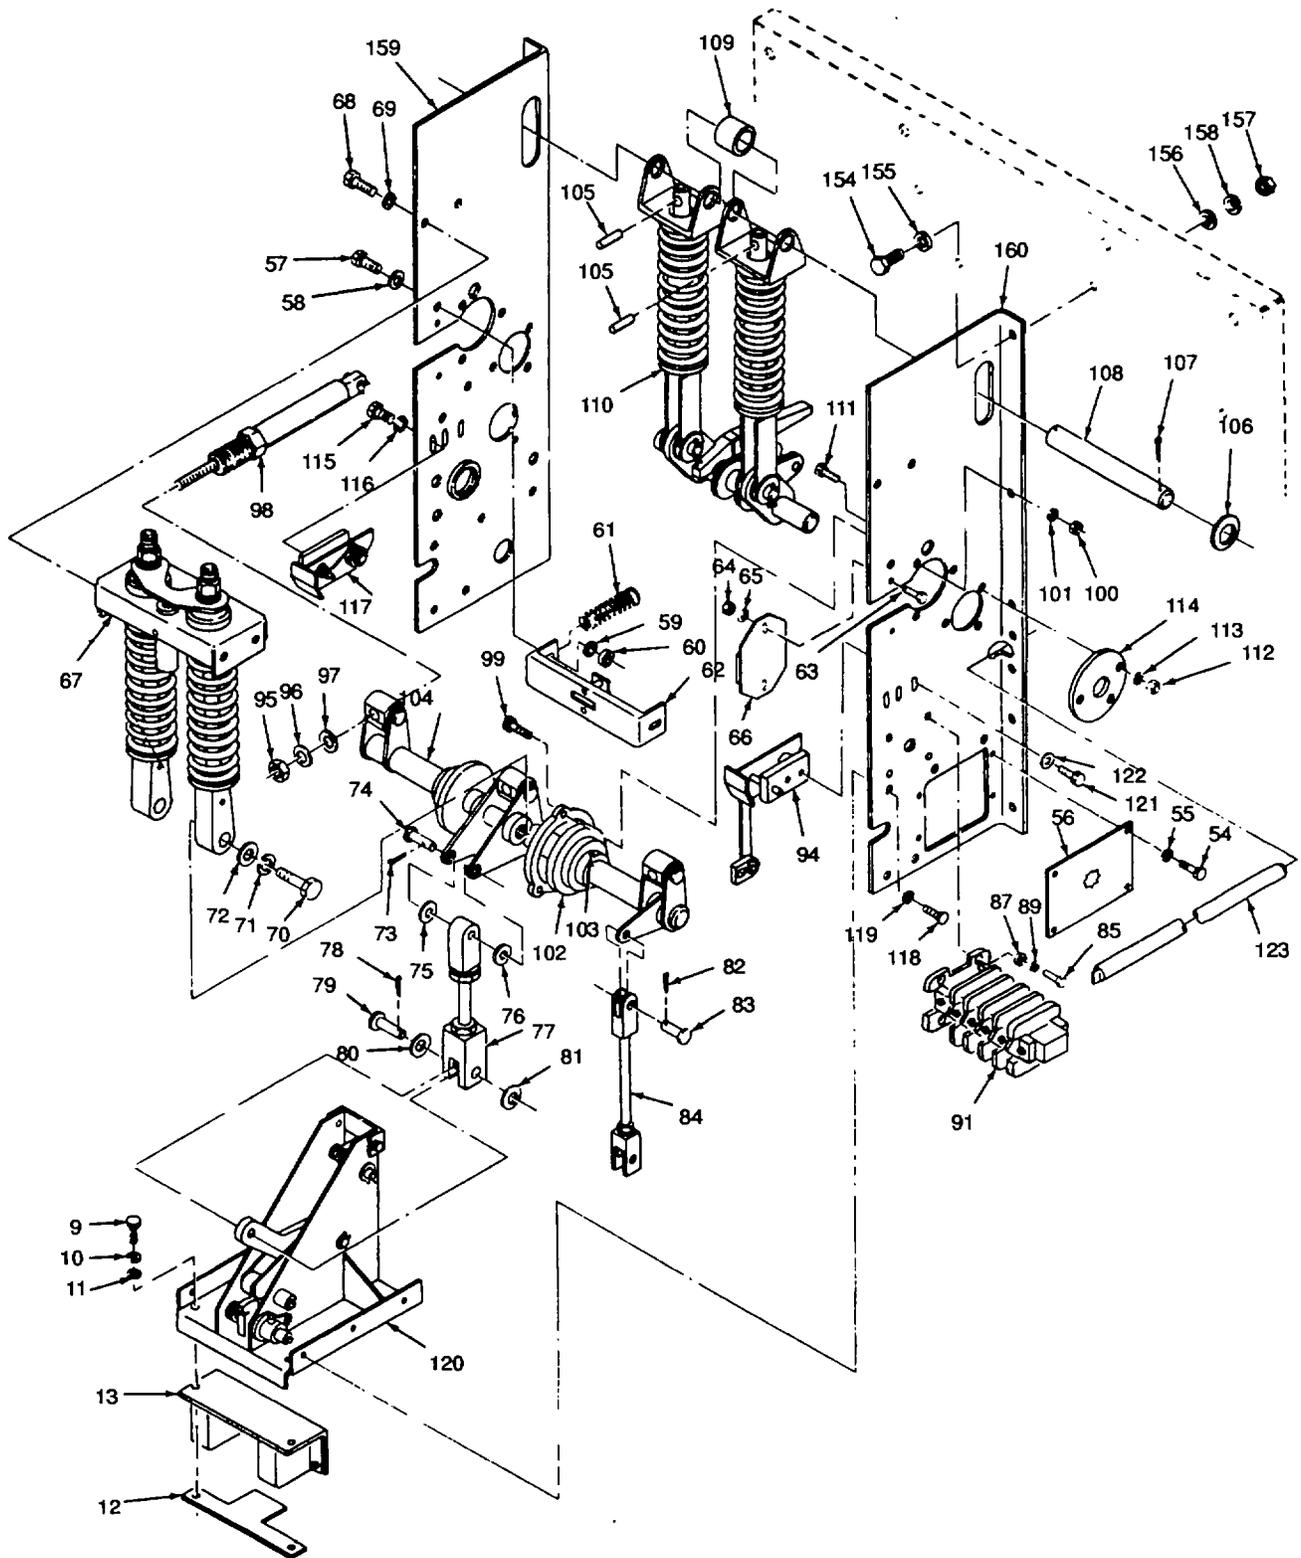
Load Circuit Breaker CB101, Exploded View (Sheet 2 of 6)
